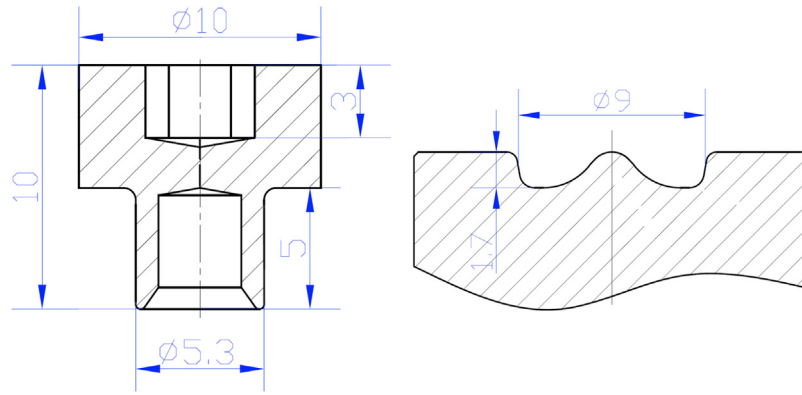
Detailed rivet and die geometry (Unit: mm).
